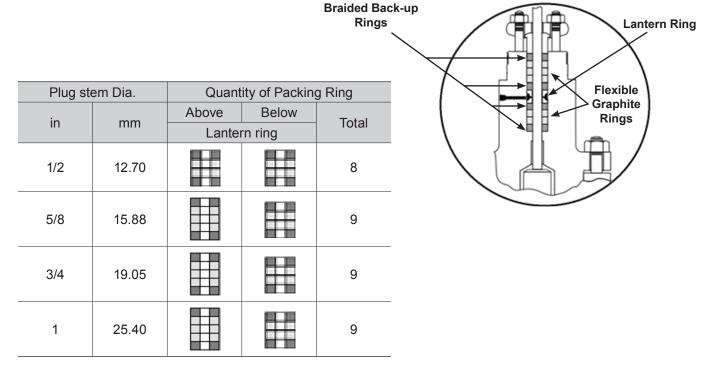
Packing ring arrangements with optional Lubricator Connection
